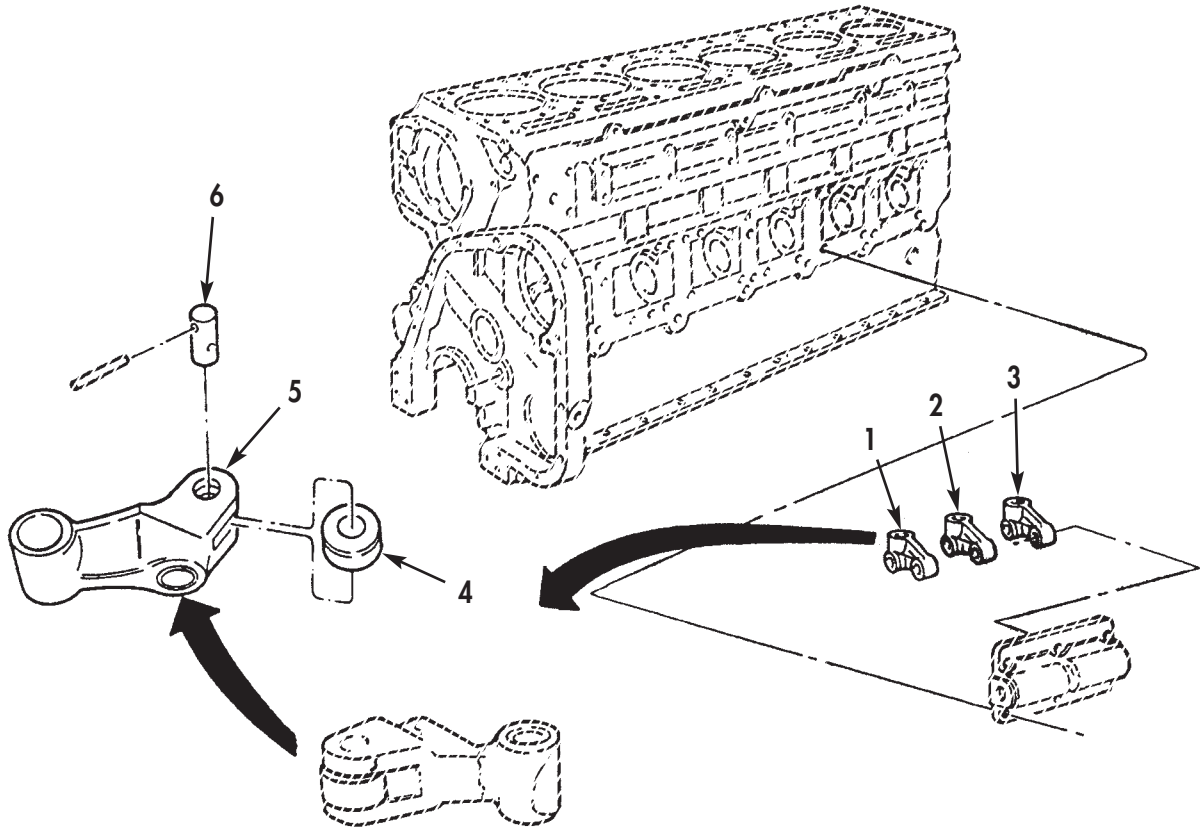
Intake, Injector, and Exhaust Cam Followers Cleaning and Inspection.
